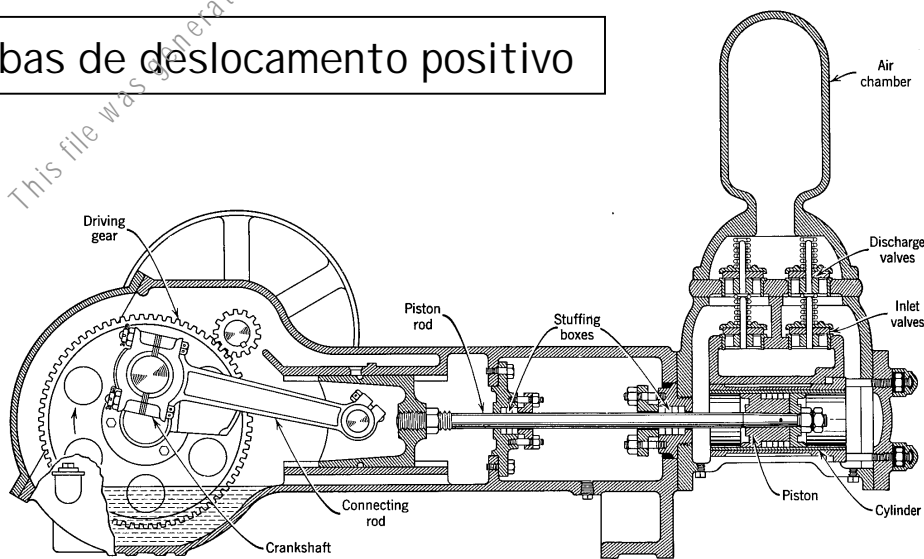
Cutaway view of a simplex piston pump. (Courtesy Novo Pump and Engine Co.)
